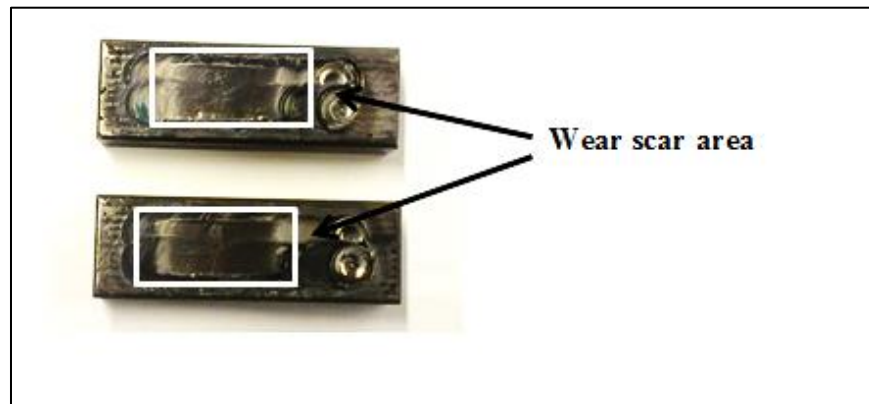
Wear-tested FSP-treated cold-sprayed WC-Ni MMC coating.
